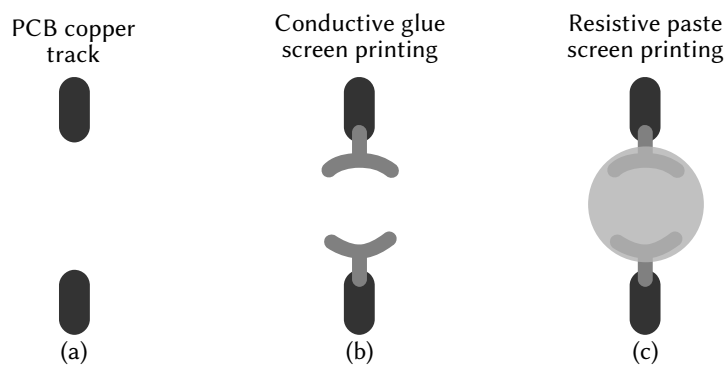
Design and fabrication process of the screen-printed heaters. First (a) the PCB is fabricated with standard manufacturing process. The contact tracks are Ni/Au coated to prevent corrosion. Then (b) conductive glue is screen-printed on the PCB to make the connection to the resistor. Finally (c), resistive paste is screen-printed to form the heaters.
